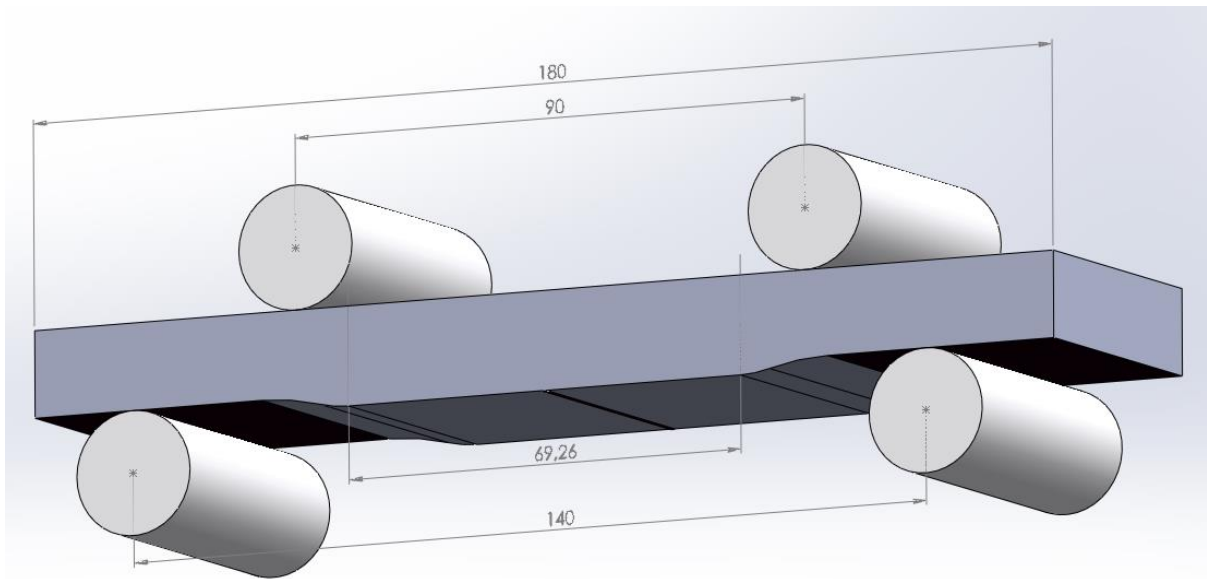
A visualisation of a fatigue specimen in a four-point bending test. The root of the bead weld has been marked for clarity as the dark centreline on the bottom face of the specimen. Faces marked in dark colour indicate the machined-flat areas. Important: the root area remained intact.
